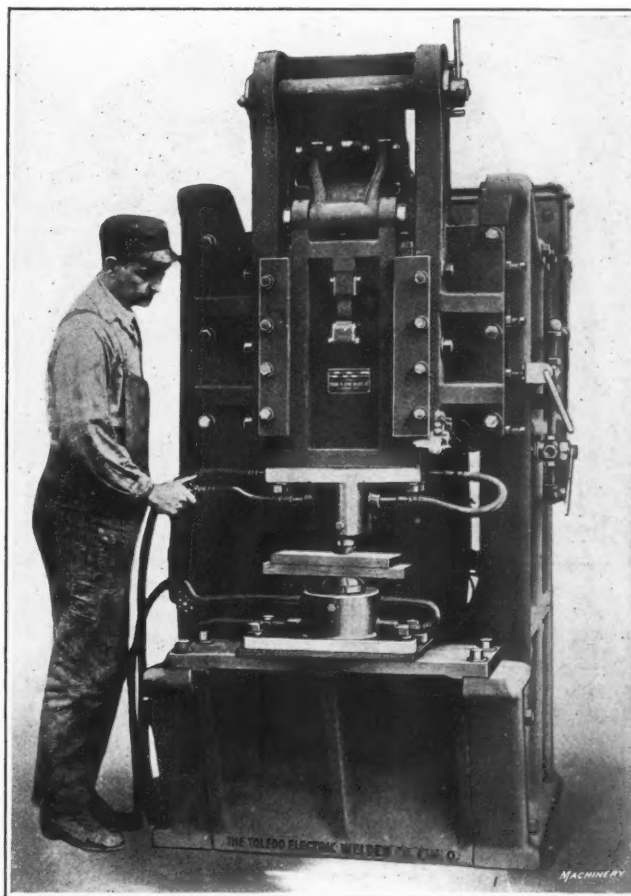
Special Toledo Electric Spot-welder having a Capacity to weld Two Plates each 1/4 inch Thick and applying Hydraulic Pressure for operating the Upper Electrode
